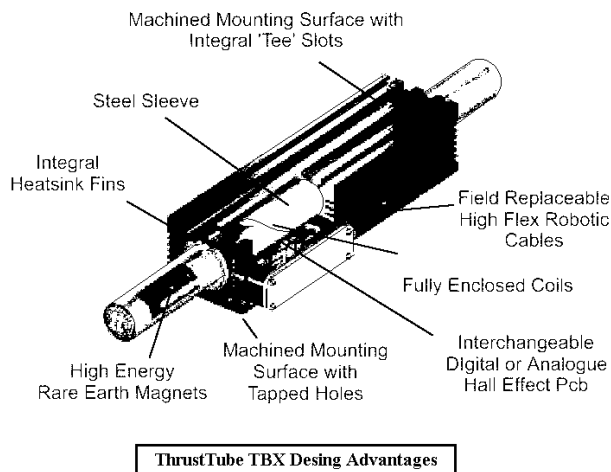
Linear motor - basic design (adapted manufacturer spreadsheet)
